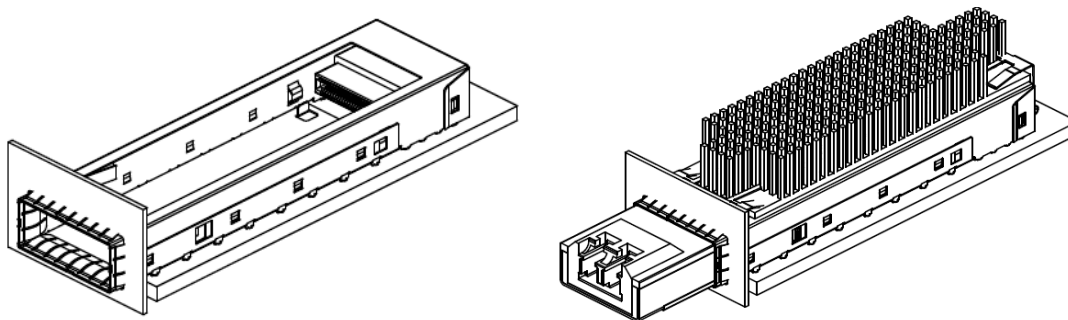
OSFP-RHS cage only (left) and OSFP-RHS cage with module and riding heat sink (right)
